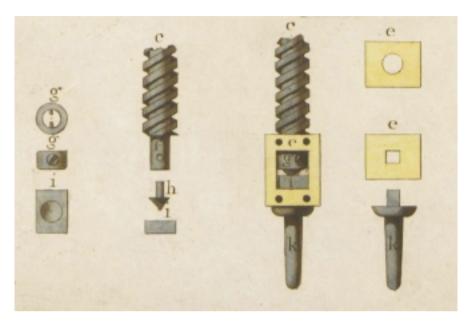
Detail of plate III, a hand-coloured aquatint, from Haas (1790), showing the screw, spindle and hose of Haas's press. The garter is marked 'g' and the brass hose 'e'. Actual size.
